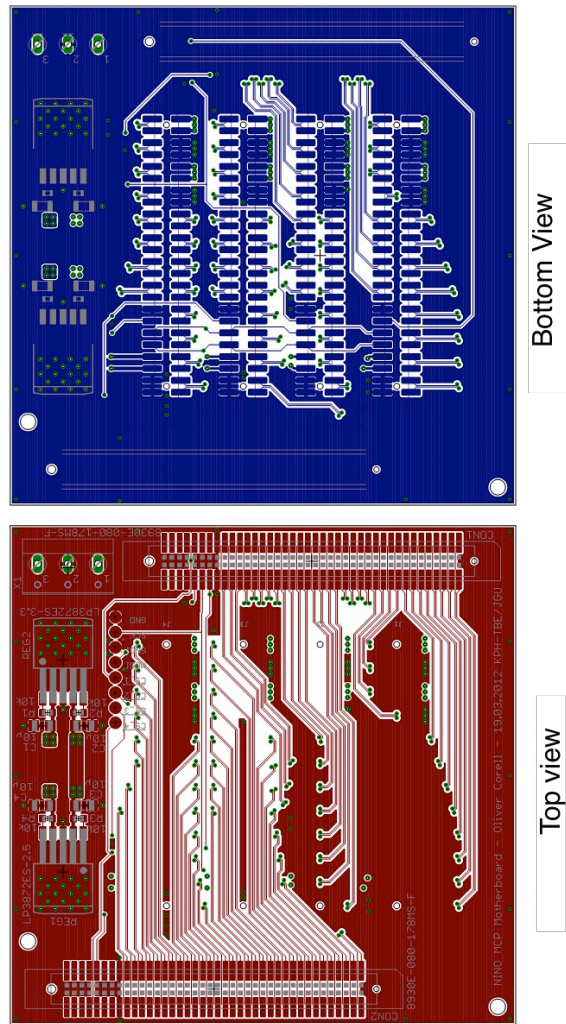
Top and bottom view of the layout drawing for the FEE mother board.
